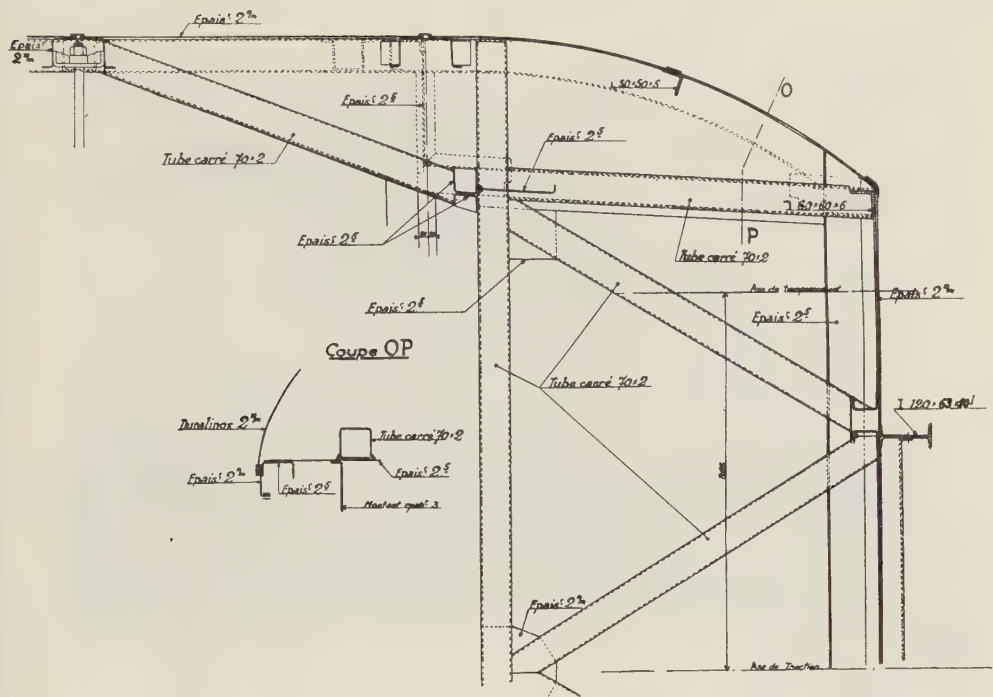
Metallised coach. — End framing. — Section at cantrail level.
